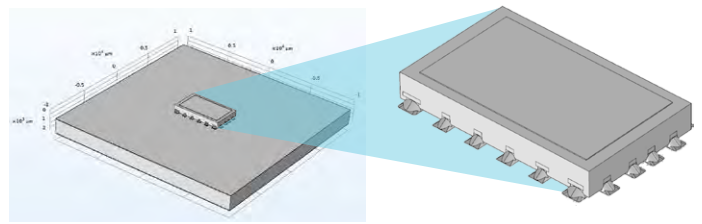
3D buildup of an EPC2302 QFN device that is surface mounted on a PCB.
